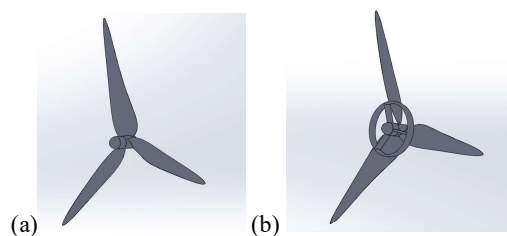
Conventional rotor (a) and rotor fitted with guide ring (b).
